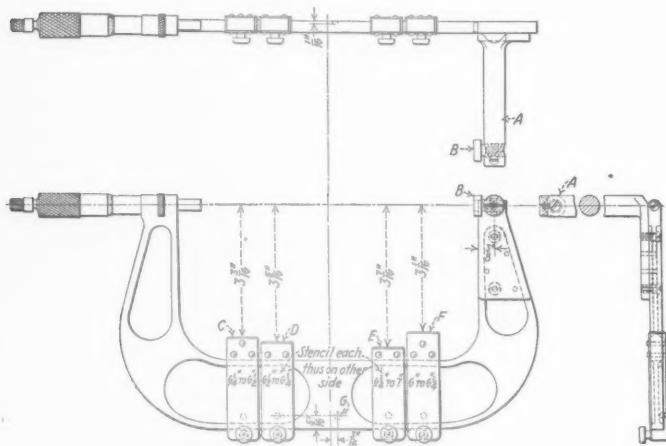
Micrometer Caliper with Special Attachment for Measuring Wheel Seats on Axles
